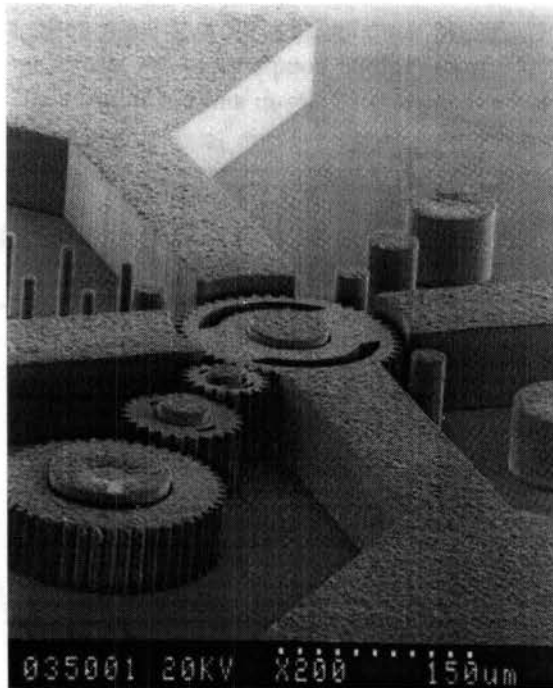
Magnetic micromotor with gear transmission manufactured By thin film processing techniques (after Fatikow and Rembold, 1997)
